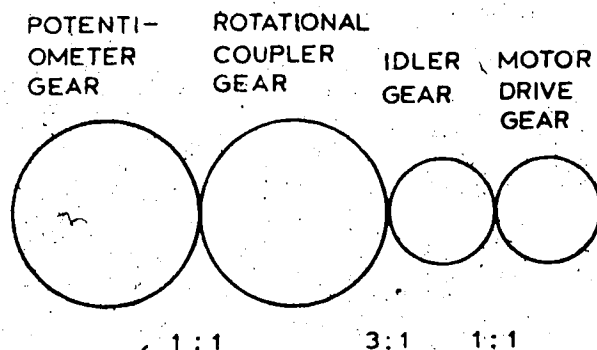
Gear arrangement of dipole rotation assembly.
